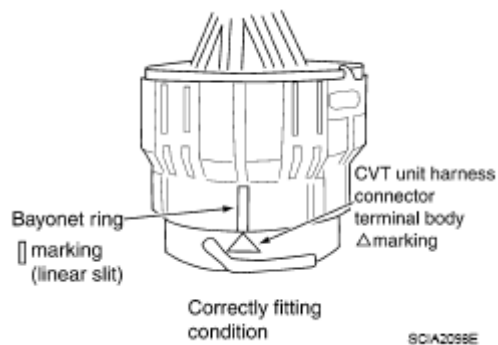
Identifying Bayonet Ring - Correctly Fitting Condition
